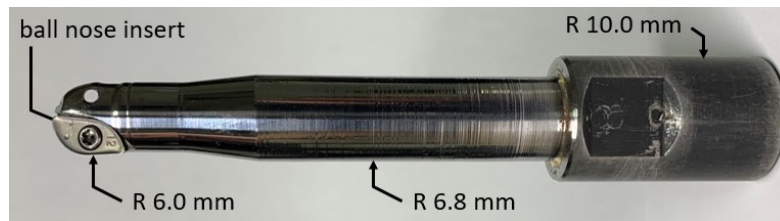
Ball-nose Insert Fixed on the Tool Holder.
